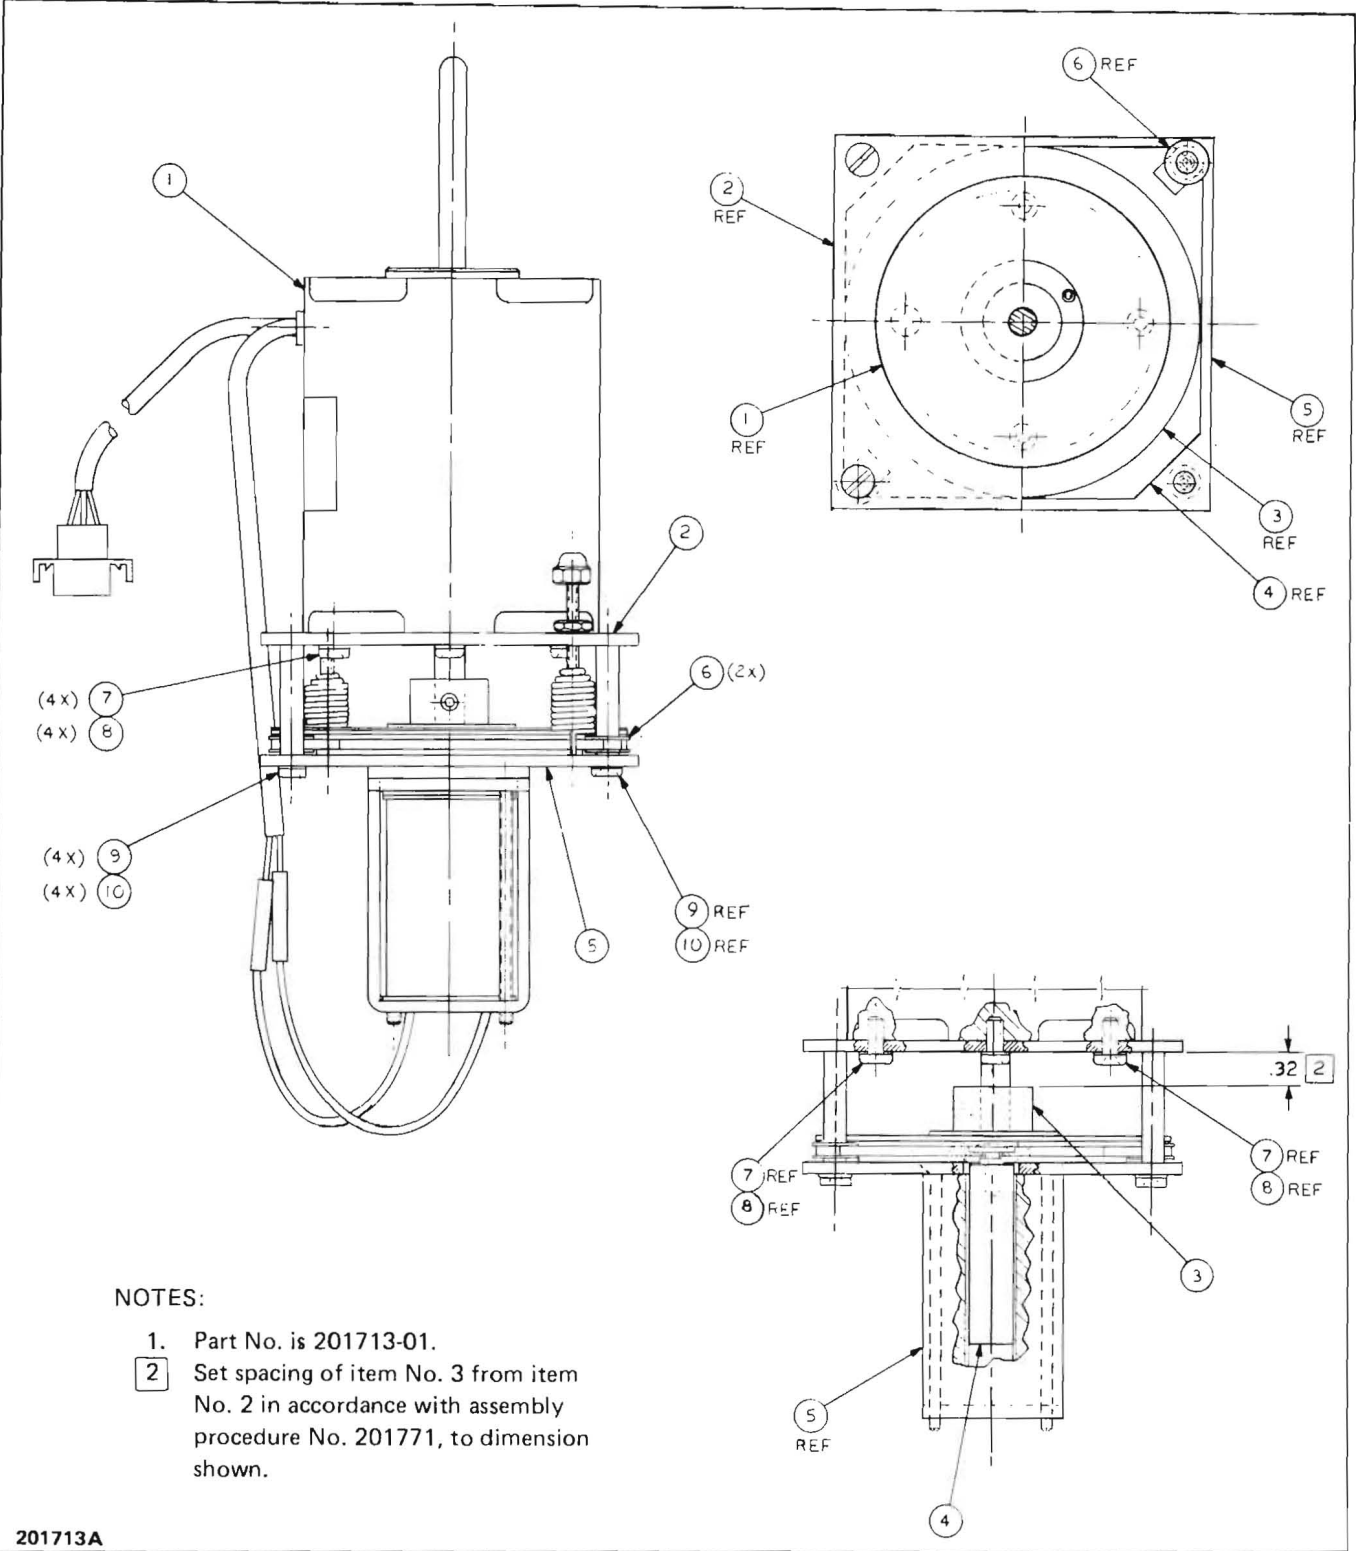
Torque Motor and Brake Assembly, Take-Up
